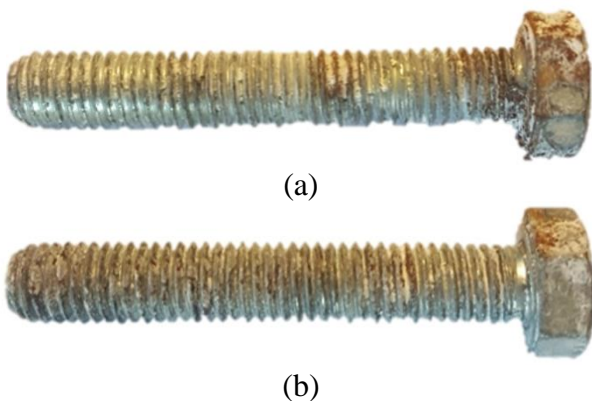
Bolts after salt spray test; a) Zn-Cr+3 b) Zinc flake. The length of the bolts is 50 mm.
